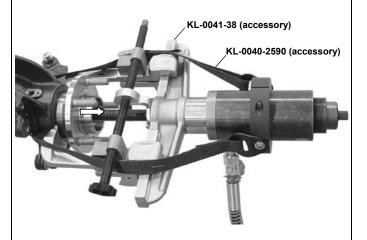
Screwing the pull spindle into hydraulic cylinder.
